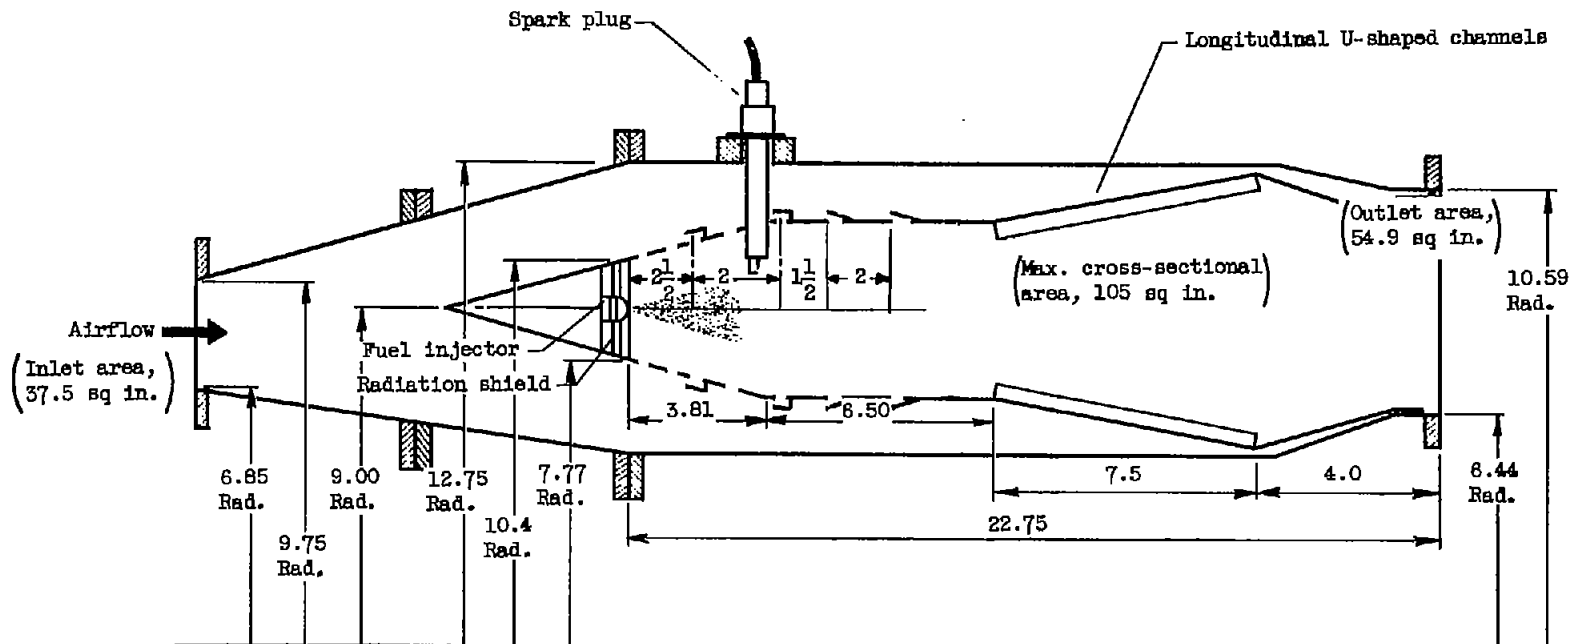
Phantom view of combustor model 48 assembled in test ducting.
